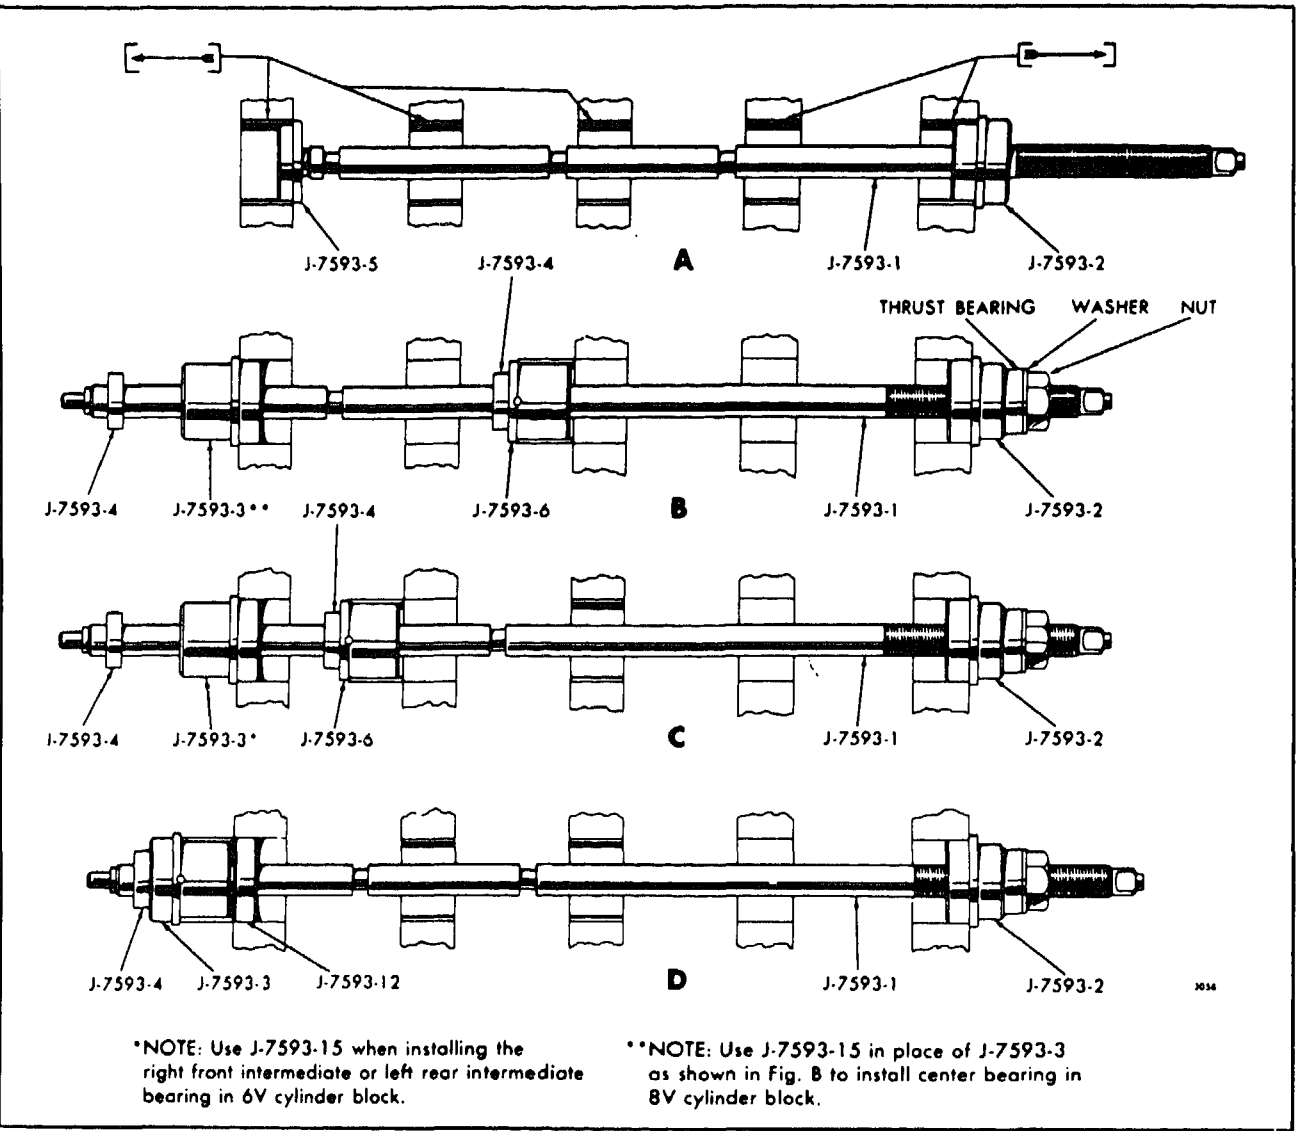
Removing and Replacing Camshaft or Balance Shaft Bearings
